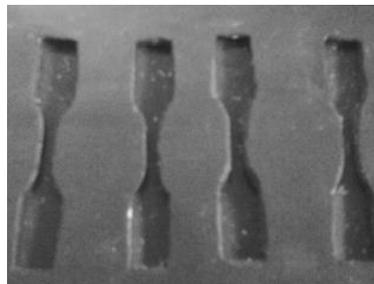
Silicone rubber mold for making test specimens - ASTM D 638 (2002).
